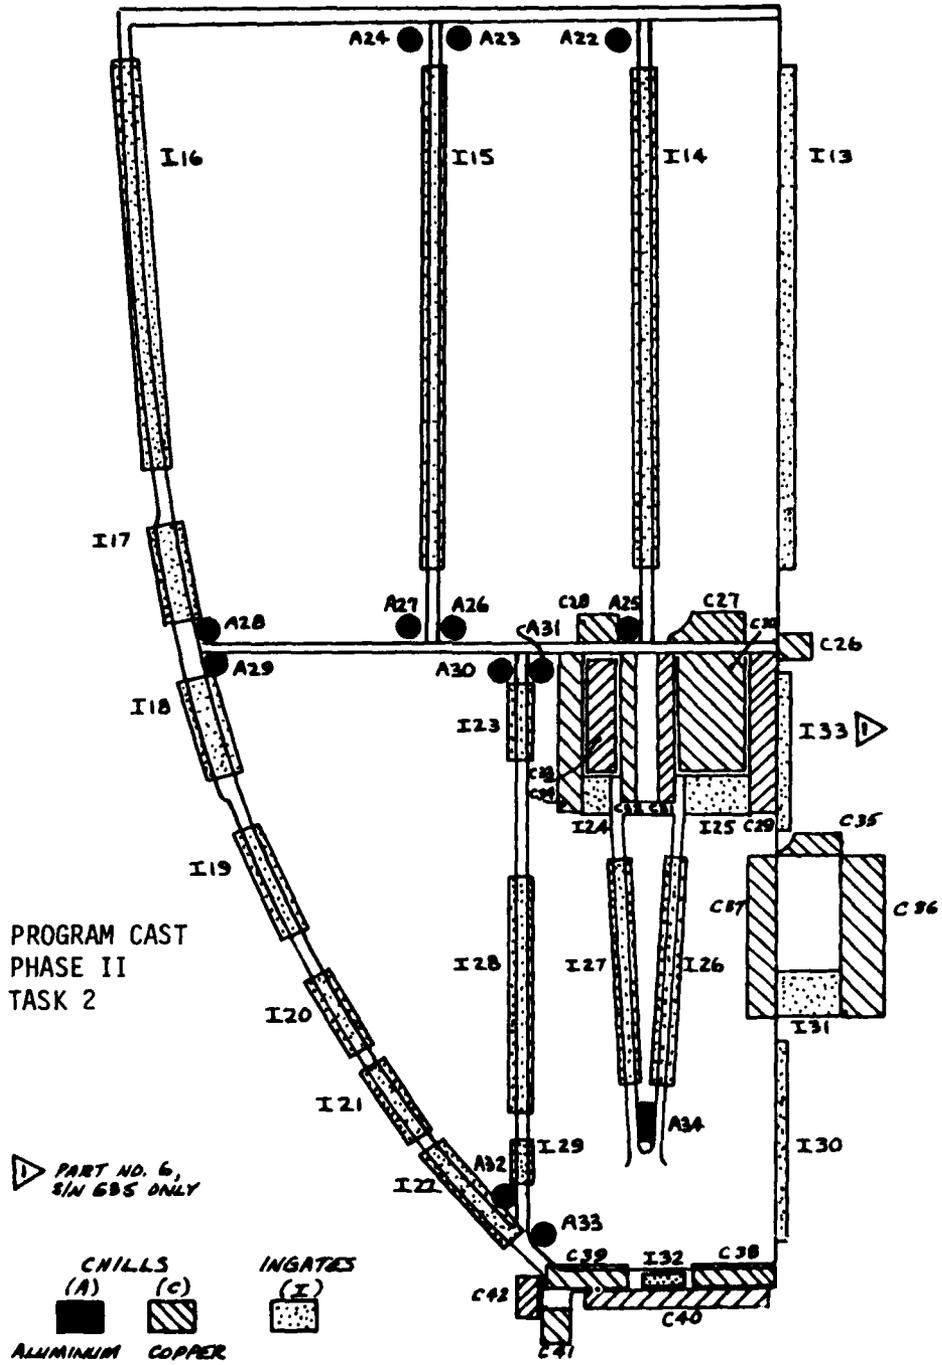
AFT FACE, BOEING PART A CASTINGS
